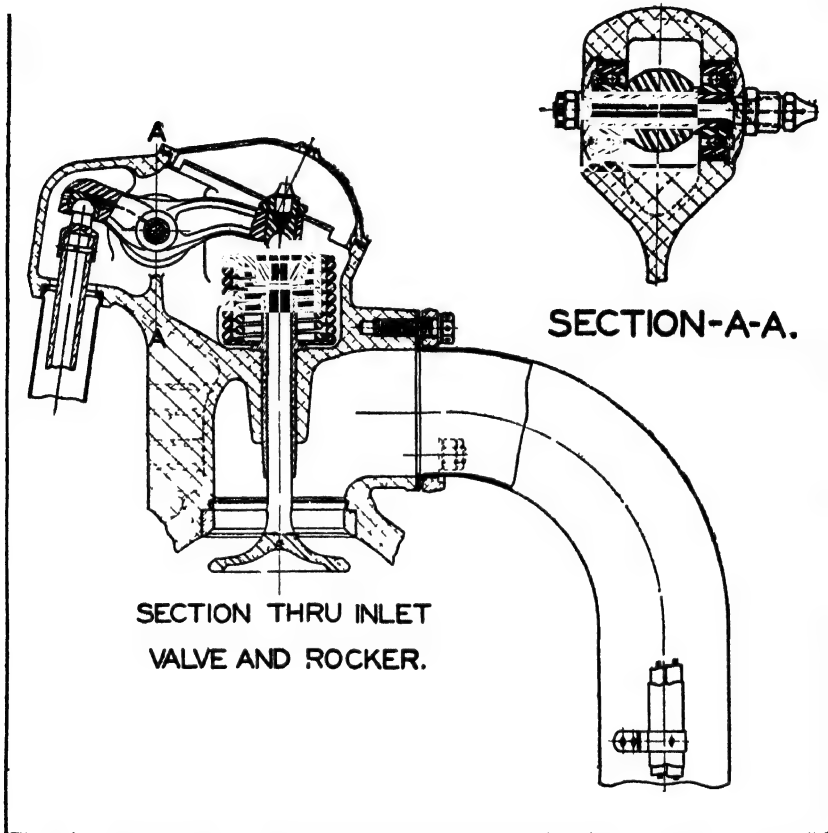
Section Through Inlet Valve Rocker of Pratt & Whitney "Wasp" Engine.
